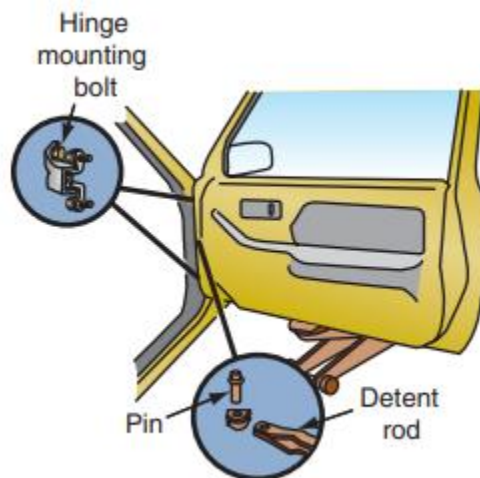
A floor jack covered with a shop towel or holding fixture
